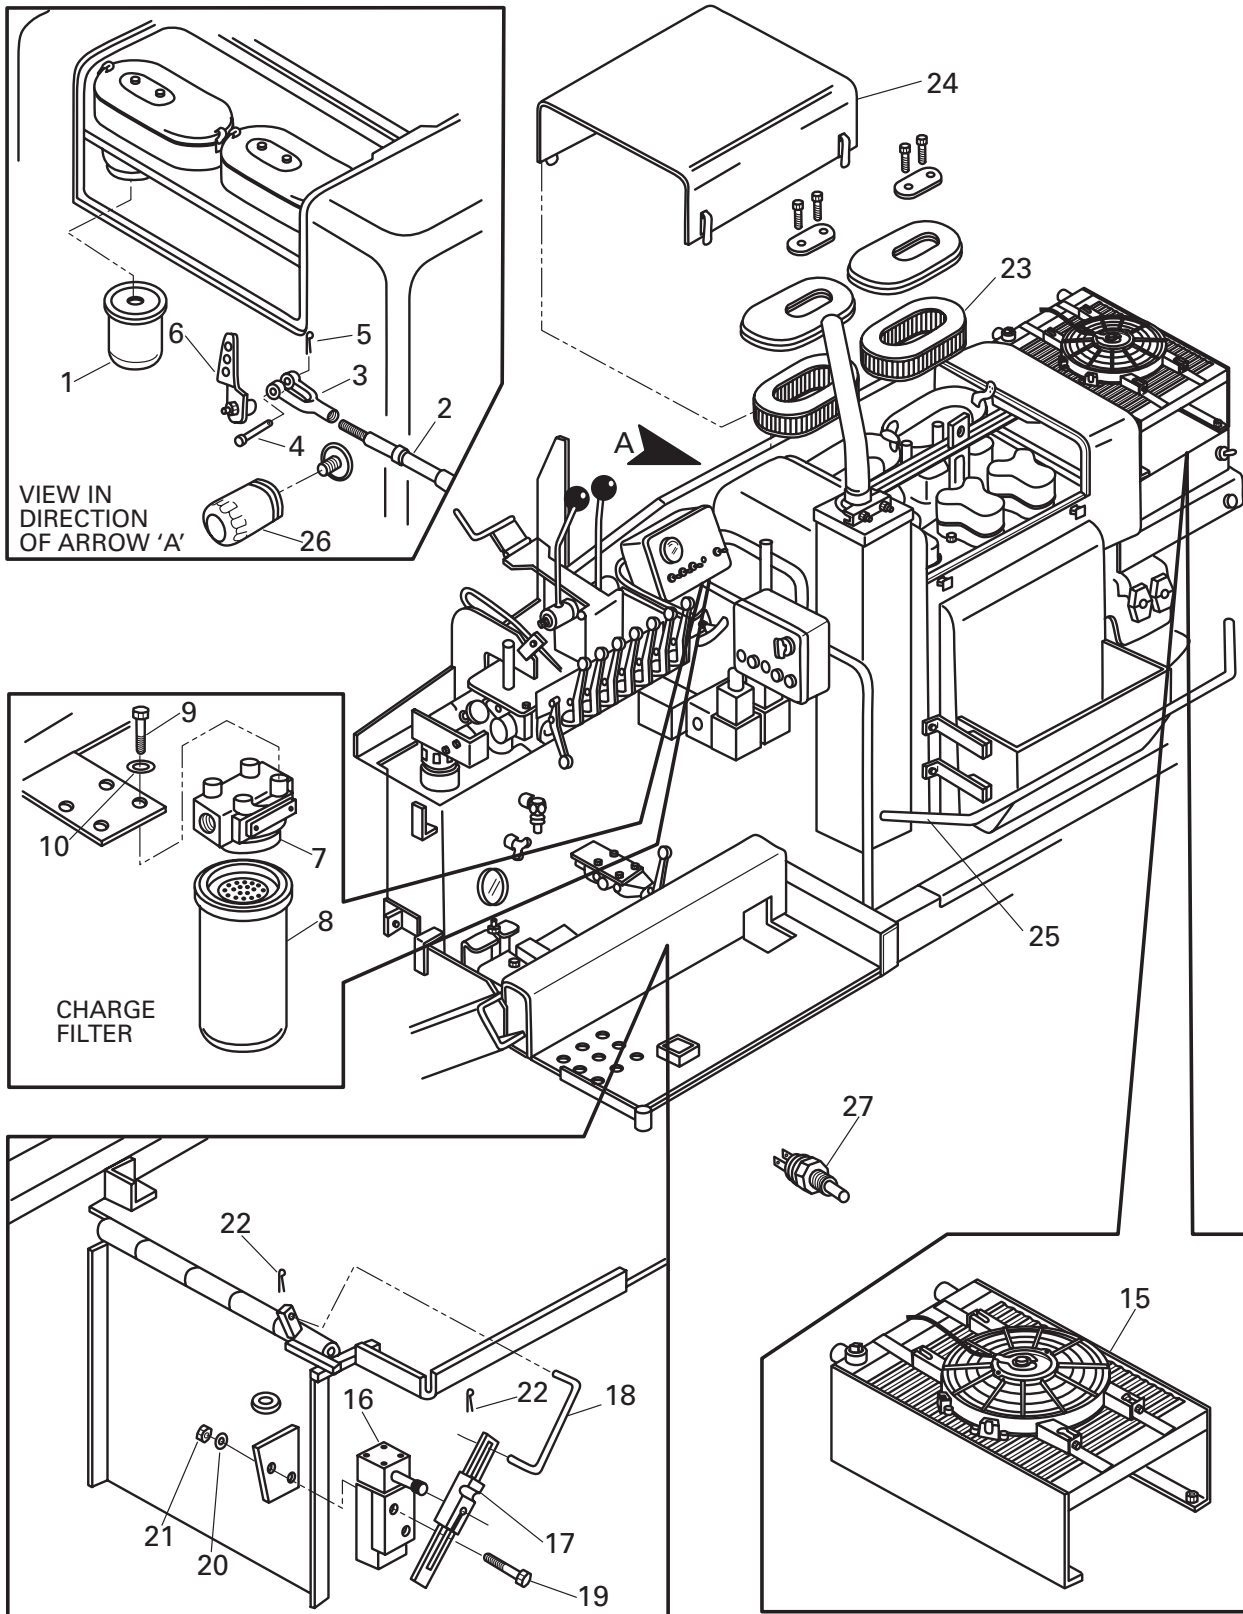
FILTER LOCATION & ACCESSORIES (HATZ)
